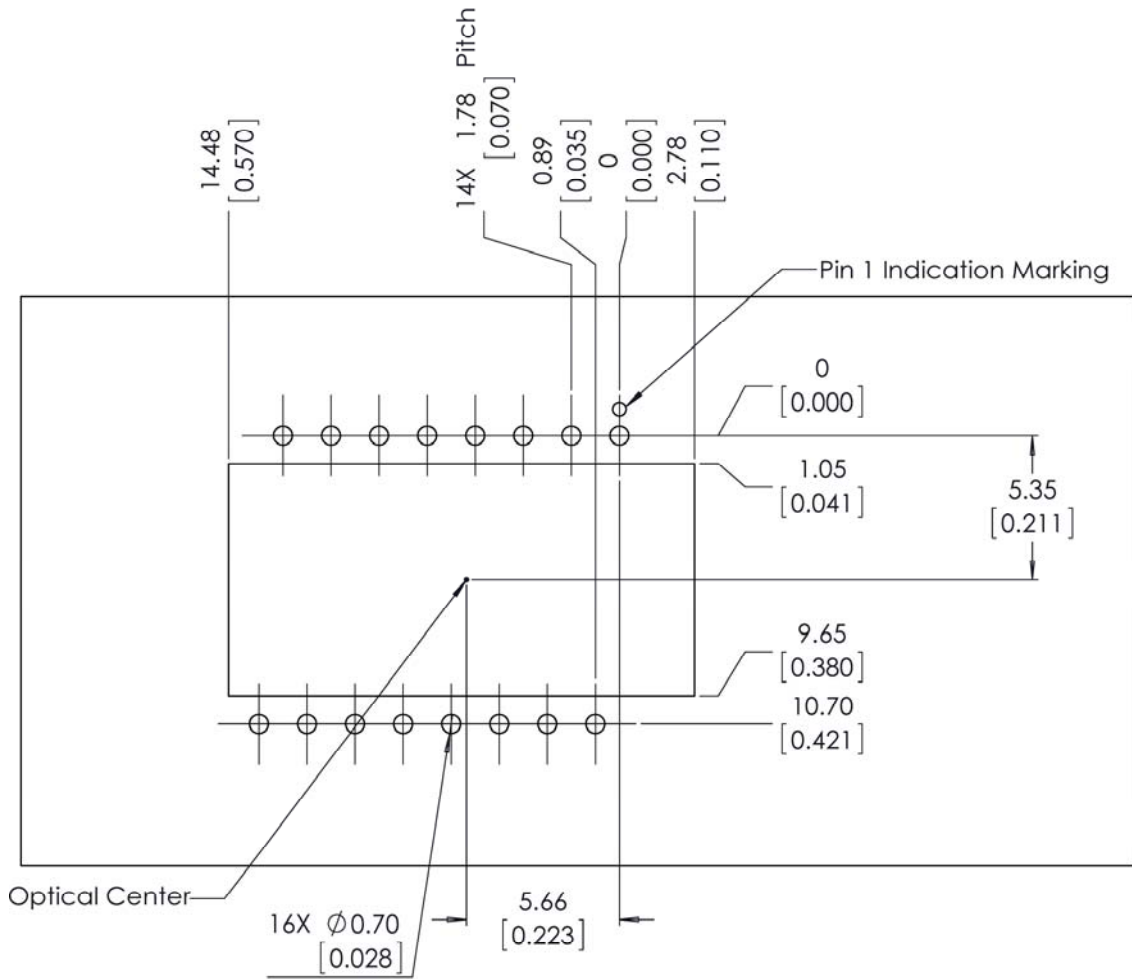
Recommended sensor orientation, mechanical cutouts and spacing (Top View)
